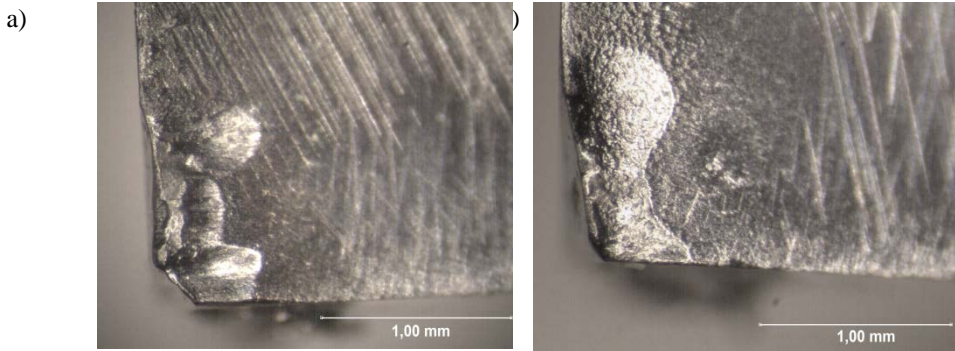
Photographs of the turning tool bits made of SW18 steel after: a) dry turning, b) turning with the cutting fluid
